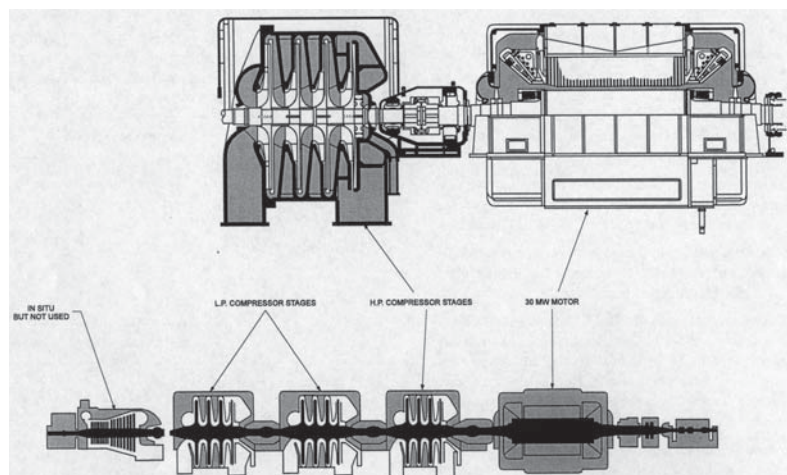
Sectional view of a GEC machine in the Air House (DTEO 1996, fig 2.4)
